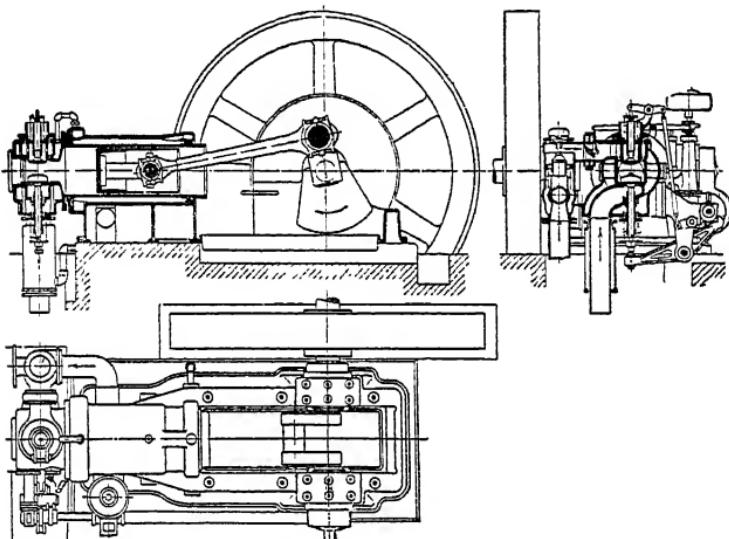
SINGLE-ACTING KÖRTING GAS ENGINE
